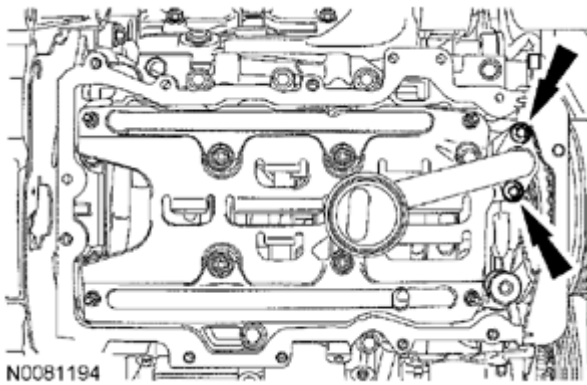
Locating Oil Pump Screen And Pickup Tube Bolts
